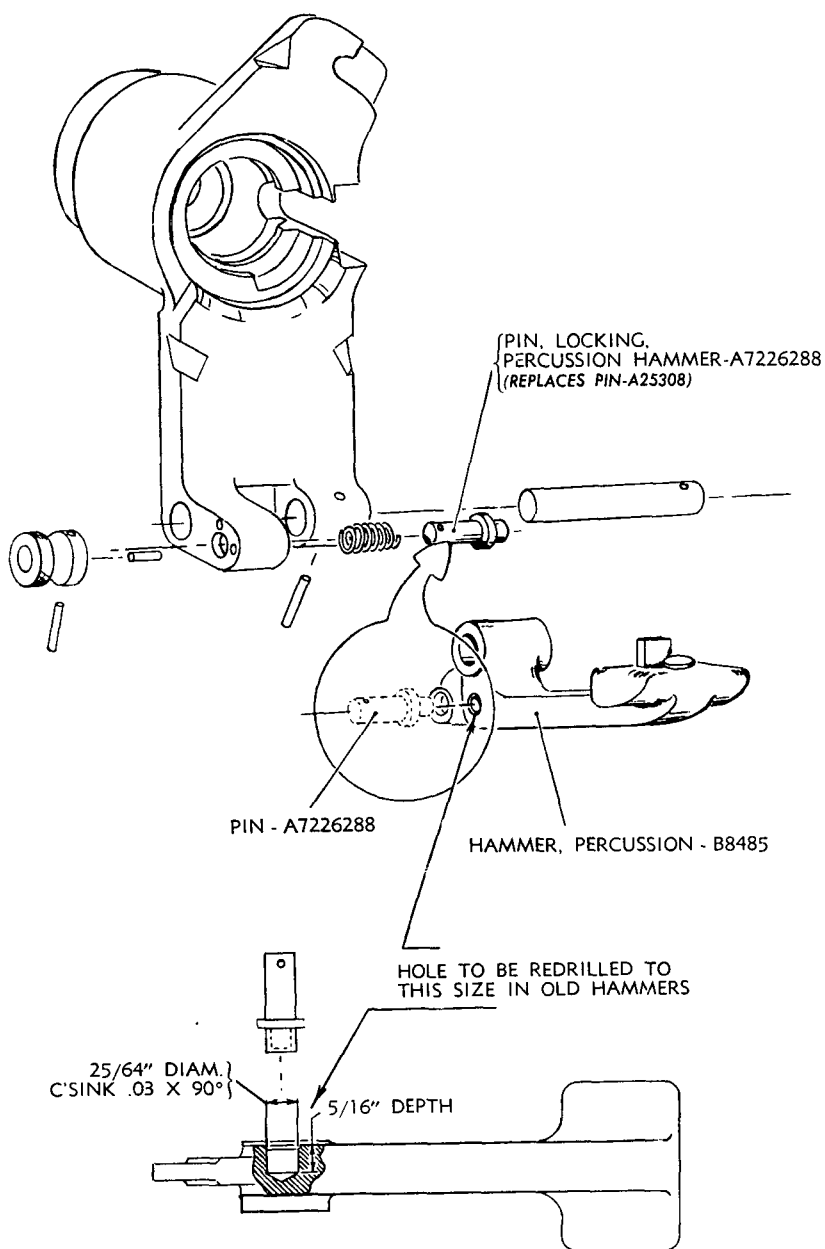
Firing mechanism receiver housing assembly—exploded view.
